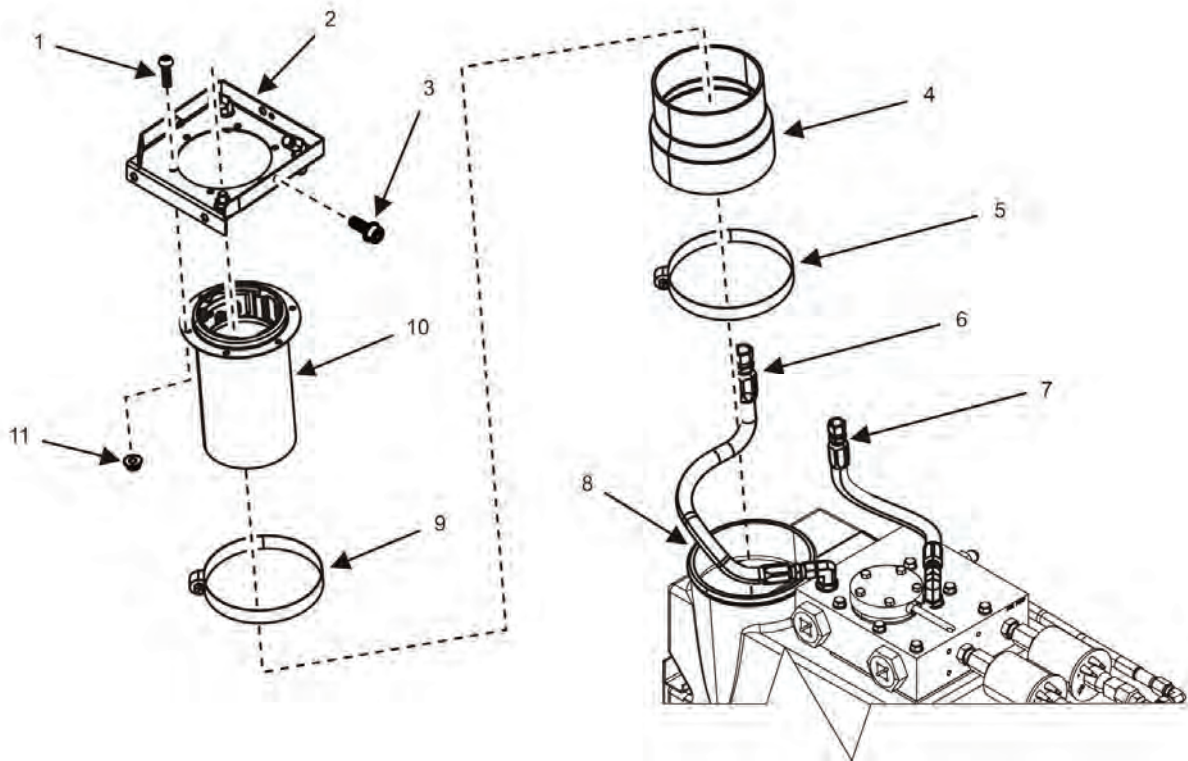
Fuel Filler Cap and Strainer — Removal.
